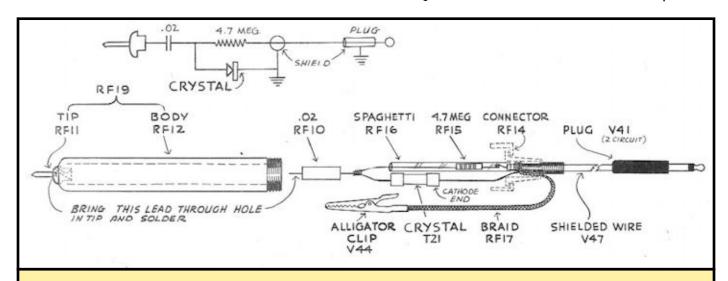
Schematic and assembly drawing of the early #309 probe using the early style probe housing. Part numbers are given in the old Heathkit part # scheme. See HOM #95, page 4 for brief details.
